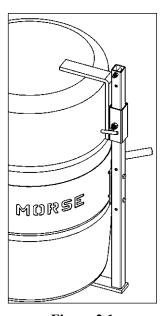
Plastic drum being lifted with part number 4556-P Bracket Assembly installed.
